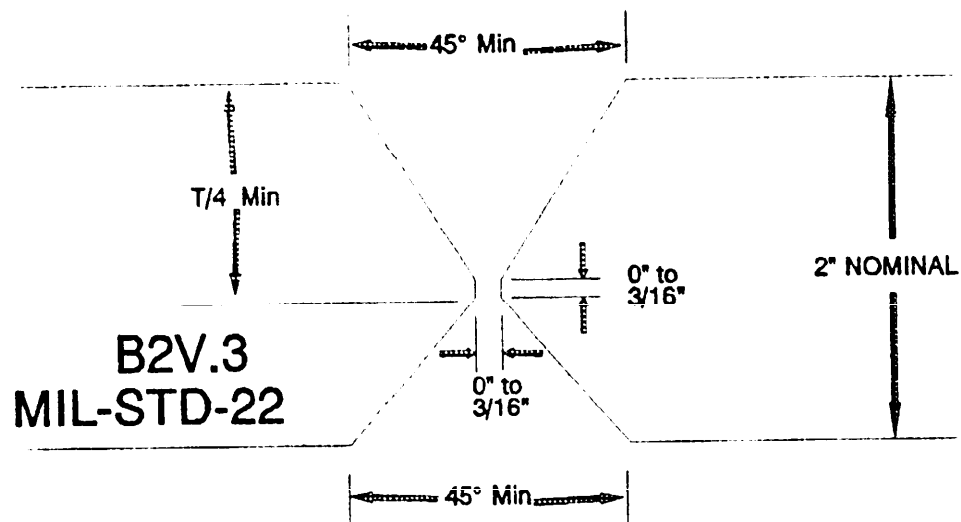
Typical joint configurations for explosion test weldments.
